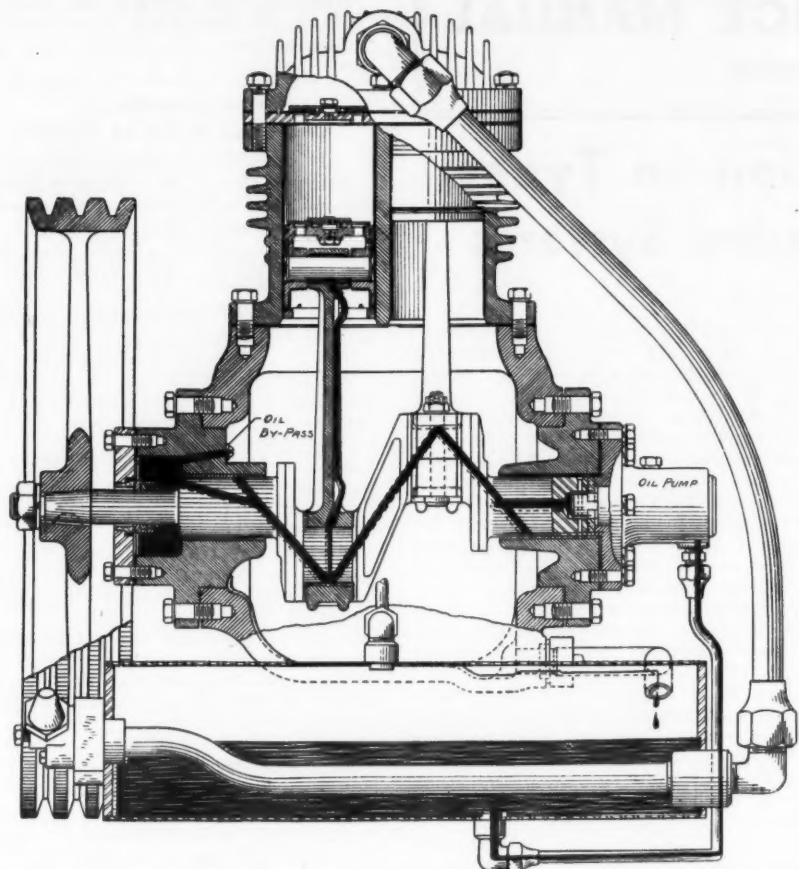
The compressor body of a Williams Ice-O-Matic refrigerating unit, showing the pressure lubrication system. The oil pump is of the rotary gear type and is driven from the crankshaft. Note that the oil supply is removed from the crankcase to an auxiliary oil tank, thereby giving a "dry" crankcase. Oil in the system is indicated by heavy black.
